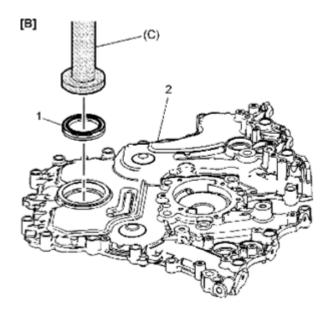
Installing Crankshaft Oil Seal To Timing Chain Cover Courtesy of SUZUKI OF AMERICA CORP.
